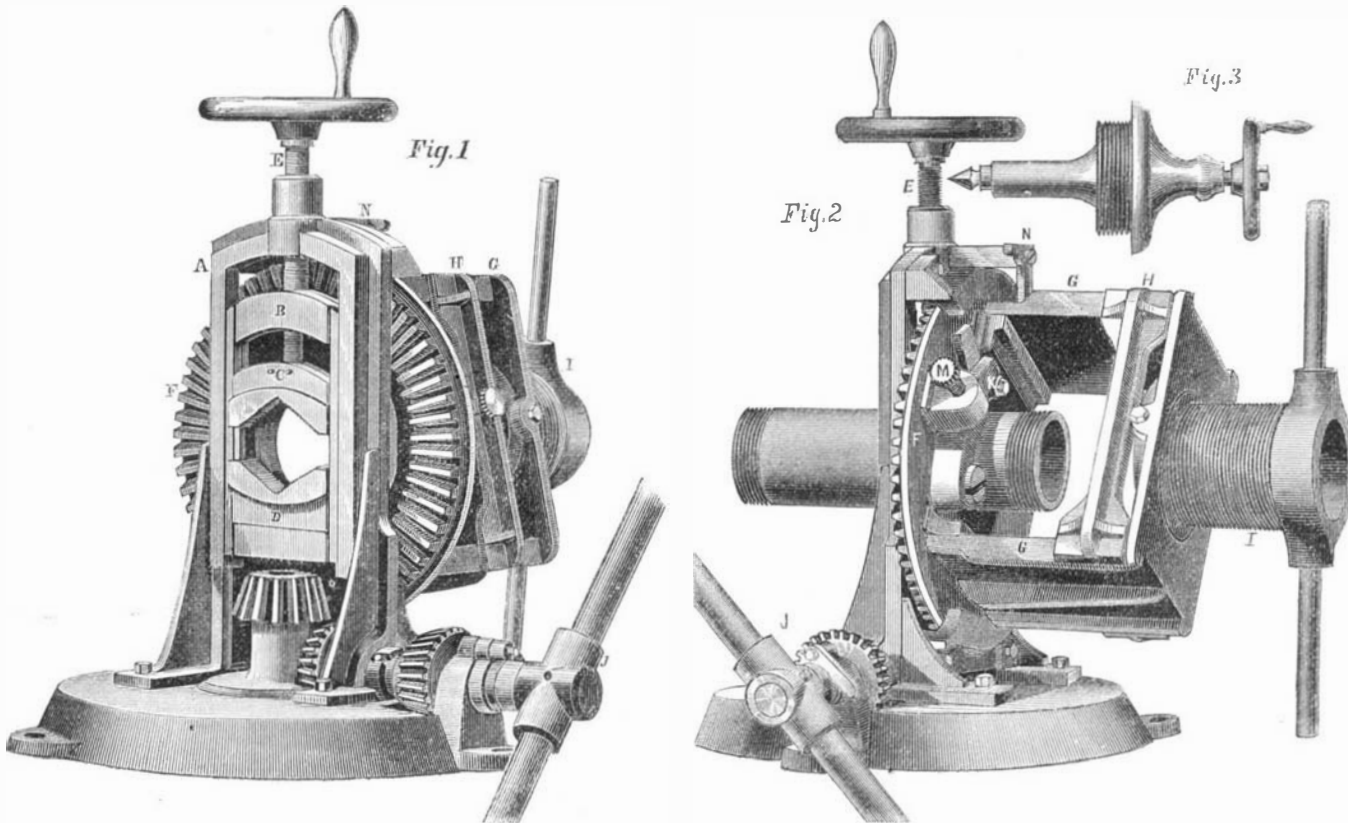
represents the machine in the operation of cutting off a piece of pipe. The machine can also be used for tapping nuts, the tap being held in the vise and the nut in the carriage, H, or *vice versa*.
